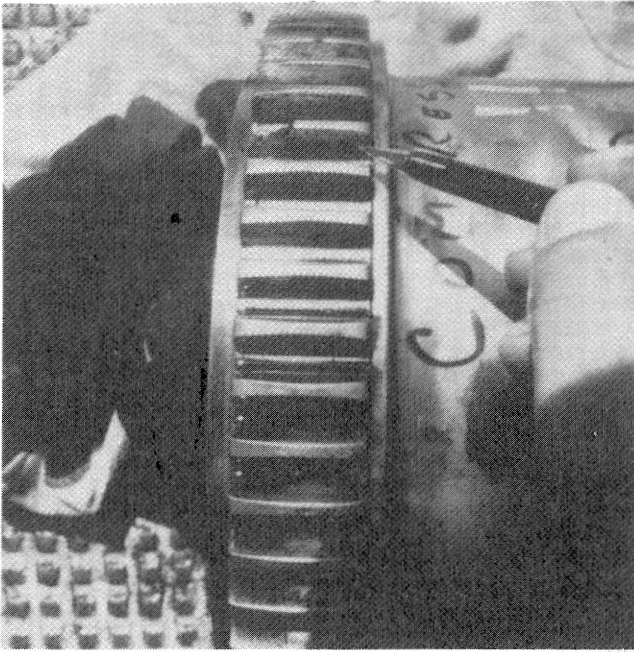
A Broken Tooth and Heavy Tooth Pitting Were Found on the Compressor Side of the Spool Piece.
